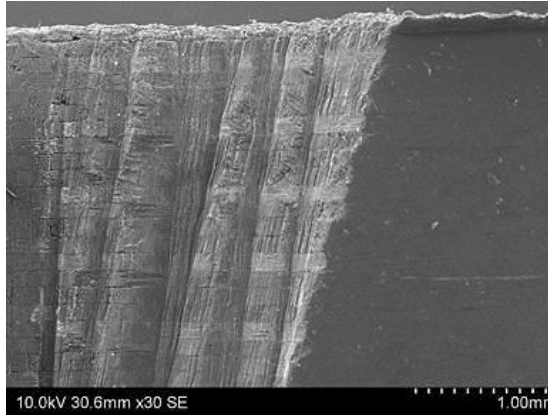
SEM sectional view of 6 mm drilled hole.
